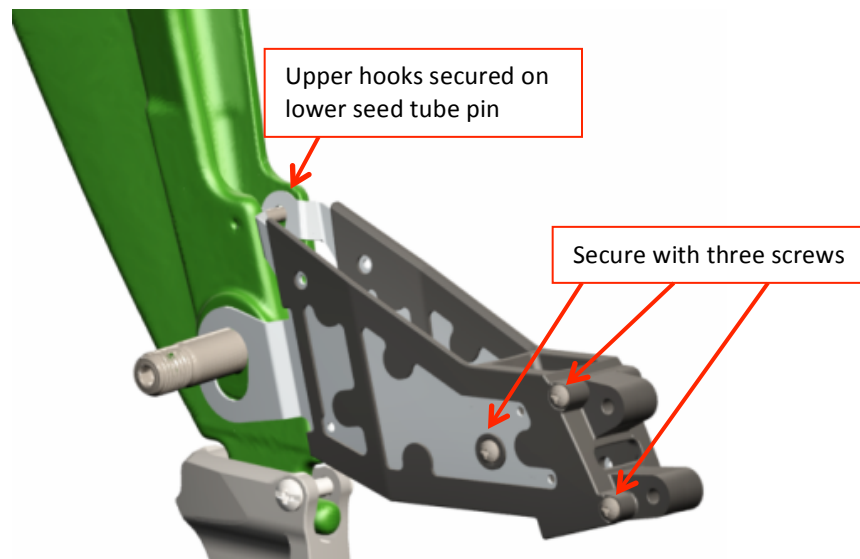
Quick Attach Keeton Firmer Bracket Installed
